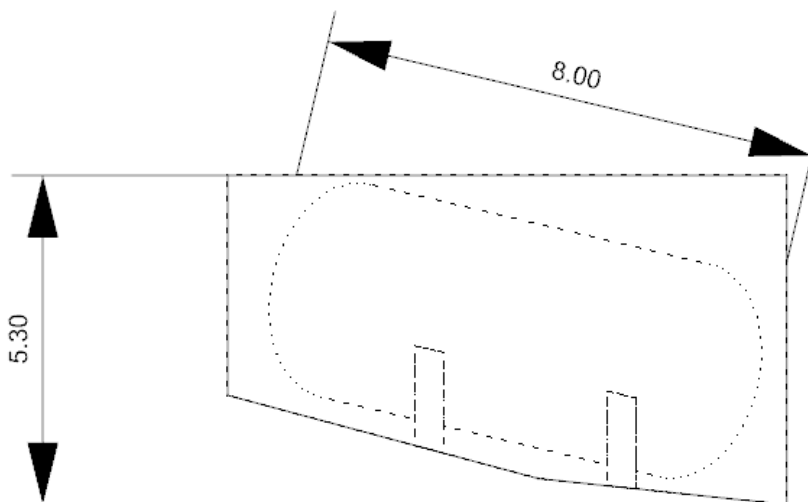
Side view of the Wärtsilä tank inside the recoil tank
